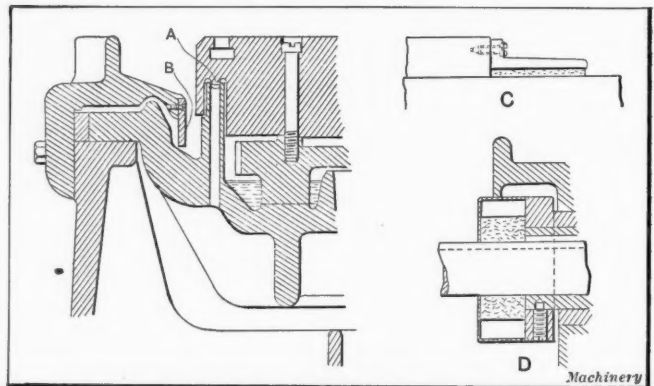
Guards for Grinding Machine Tables and Felt Pads for Table Slides and Shaft Bearings
